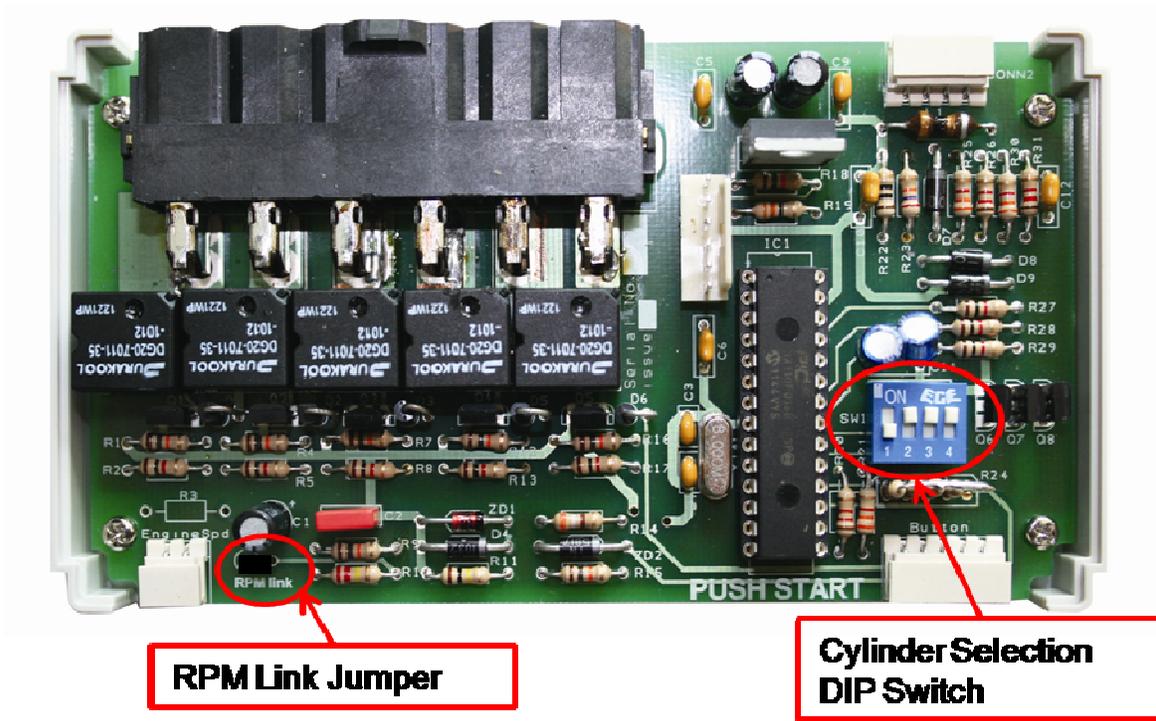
Printed Circuit Board (PCB) Image with components installed.
